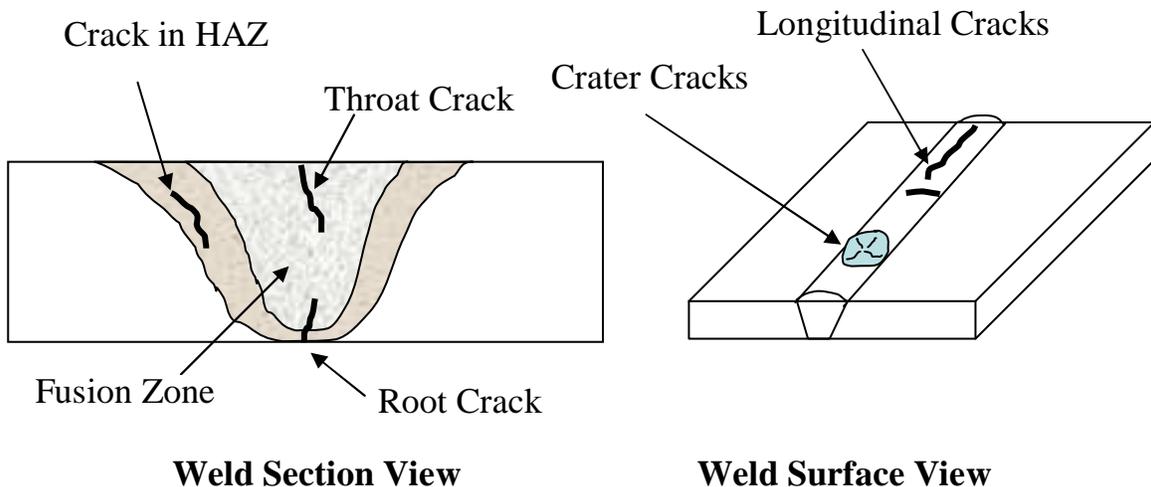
Schematic showing locations of typical hot cracks in welds.
